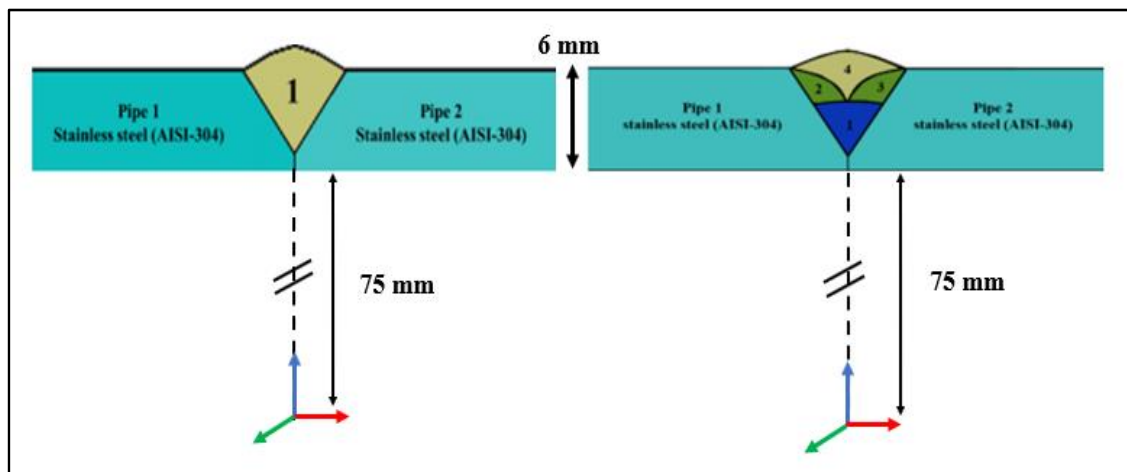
Zoom to the vicinity of one and multi-pass welding in a butt joint.
